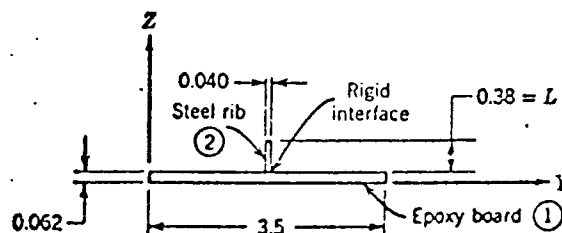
Dimensions for a rib section soldered to a circuit board.
